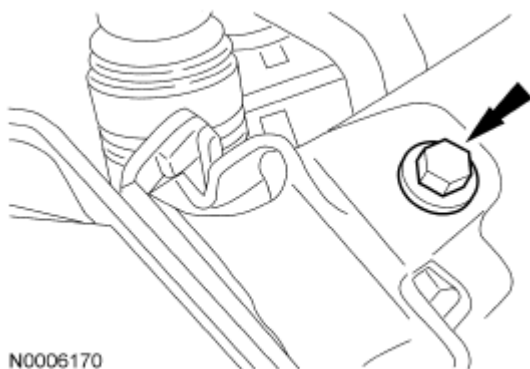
Locating LH Engine Support Insulator Bolt And Nut
